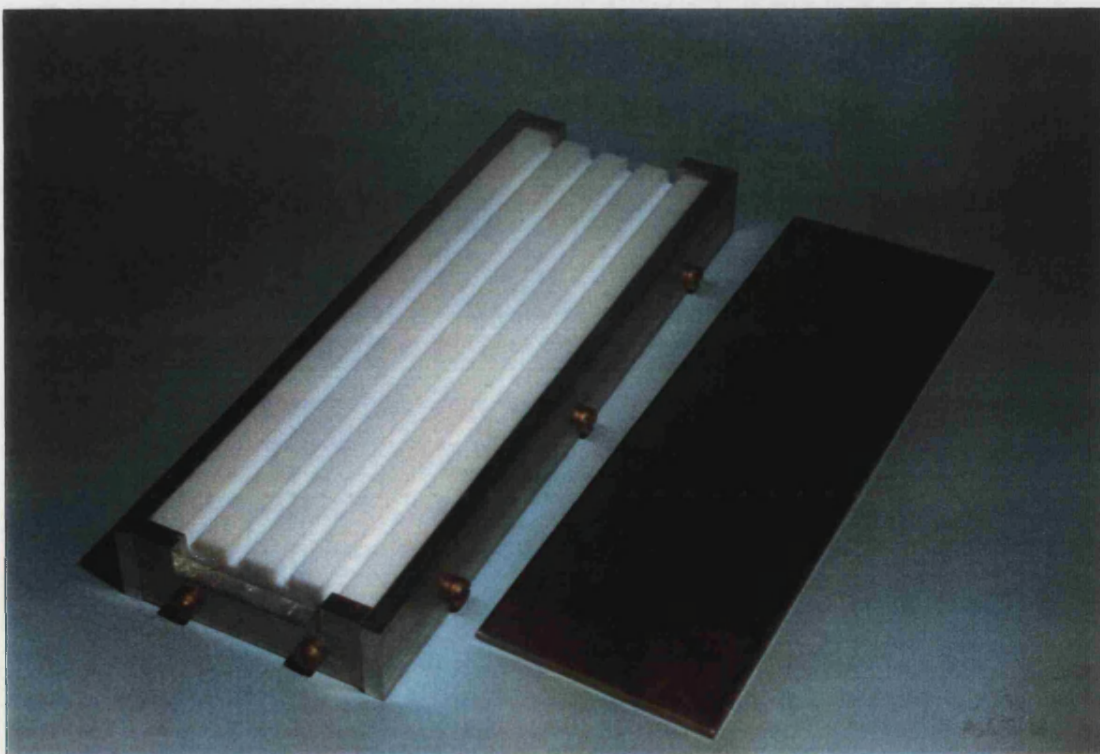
Mould for Producing Work of Fracture Specimens - Top View.
